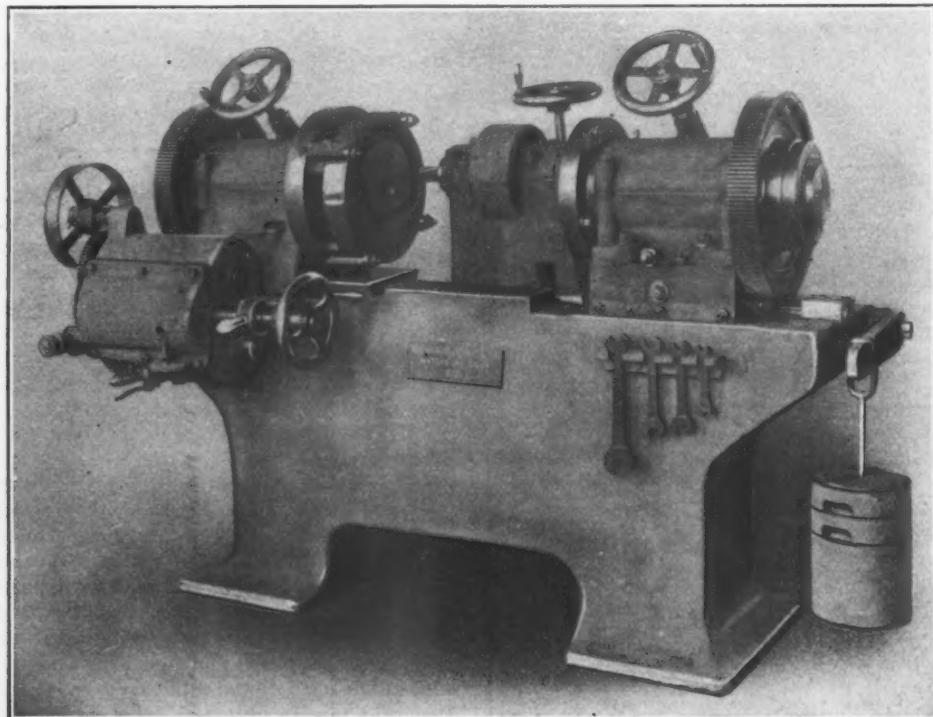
The New Cam Cutting Machine Built by the E. J. Manville Machine Company, Waterbury, Conn.
